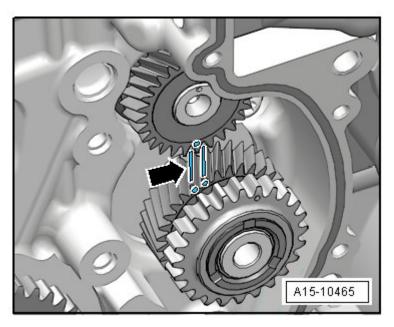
Identifying Tooth Face On Intermediate Shaft Sprocket Marked With Paint
